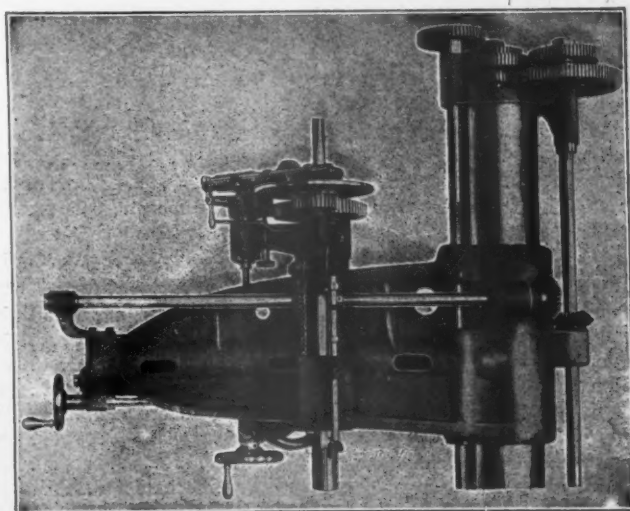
REAR VIEW OF HEAD UPON ARM, SHOWING DETAILS.
